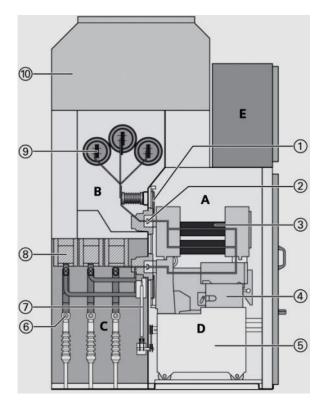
Sectional view of contactor panel with panel width 435 mm
